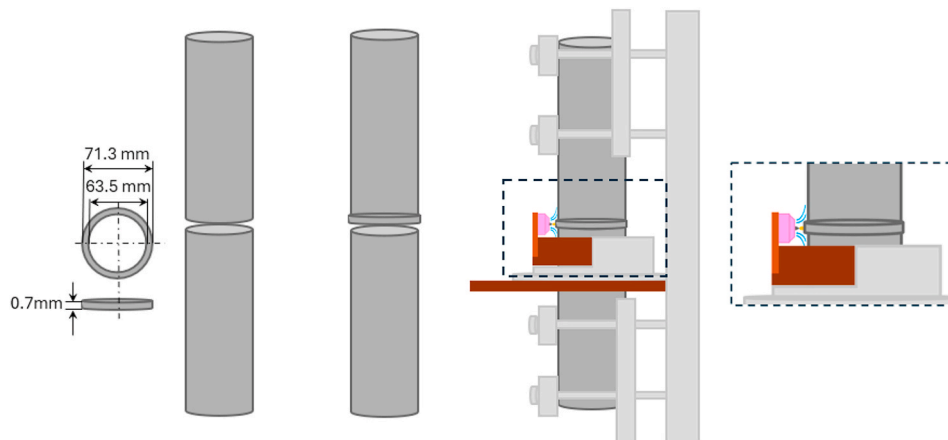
A schematic of pipe setups and welding configuration for both IR and LD pipes.
